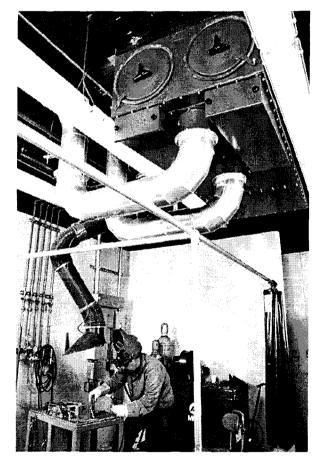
Movable Fume Extractor Positioned Near the Welding Arc
